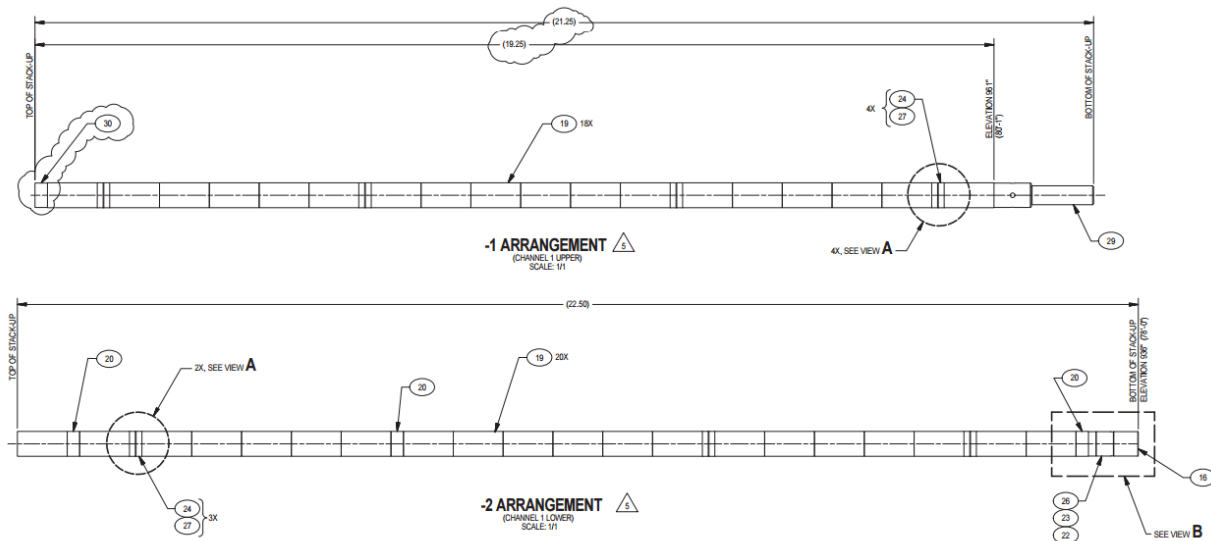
AGC-4 specimen and capsule elevation locations (from DWG 604553, “AGC-4 Specimen Stack-up Arrangements”).
